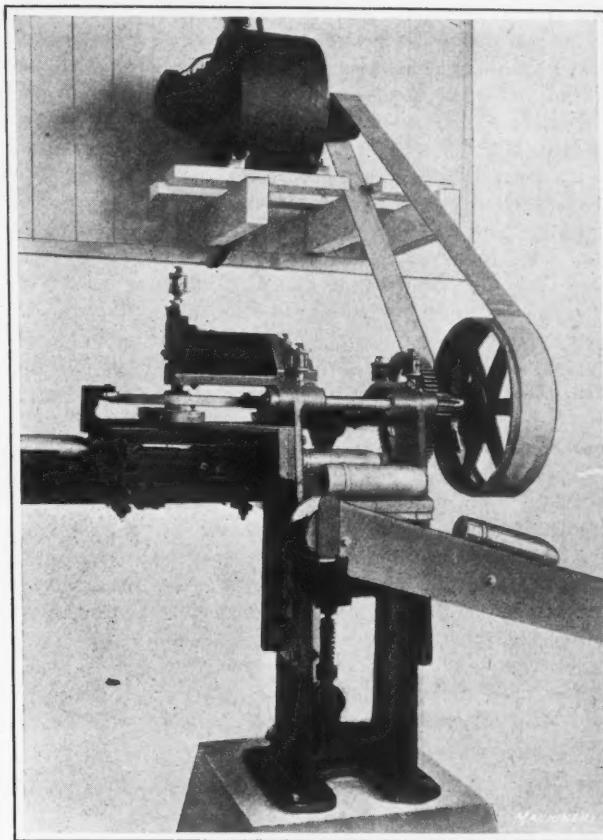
Front View of Shell Marking Machine showing Motor Drive
